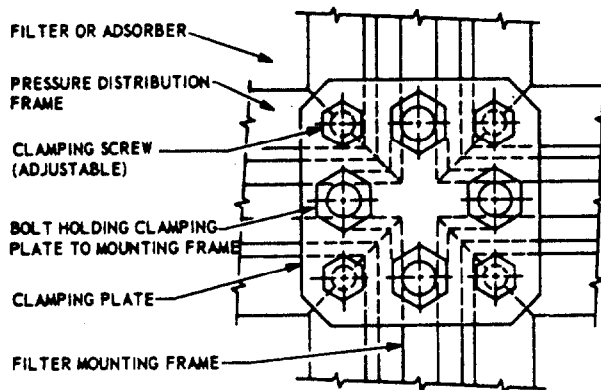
Clamping plate assembly, Brookhaven bypass filter pit. Clamping pressure on individual filters is adjustable, but entire assembly must be removed to replace a filter.
